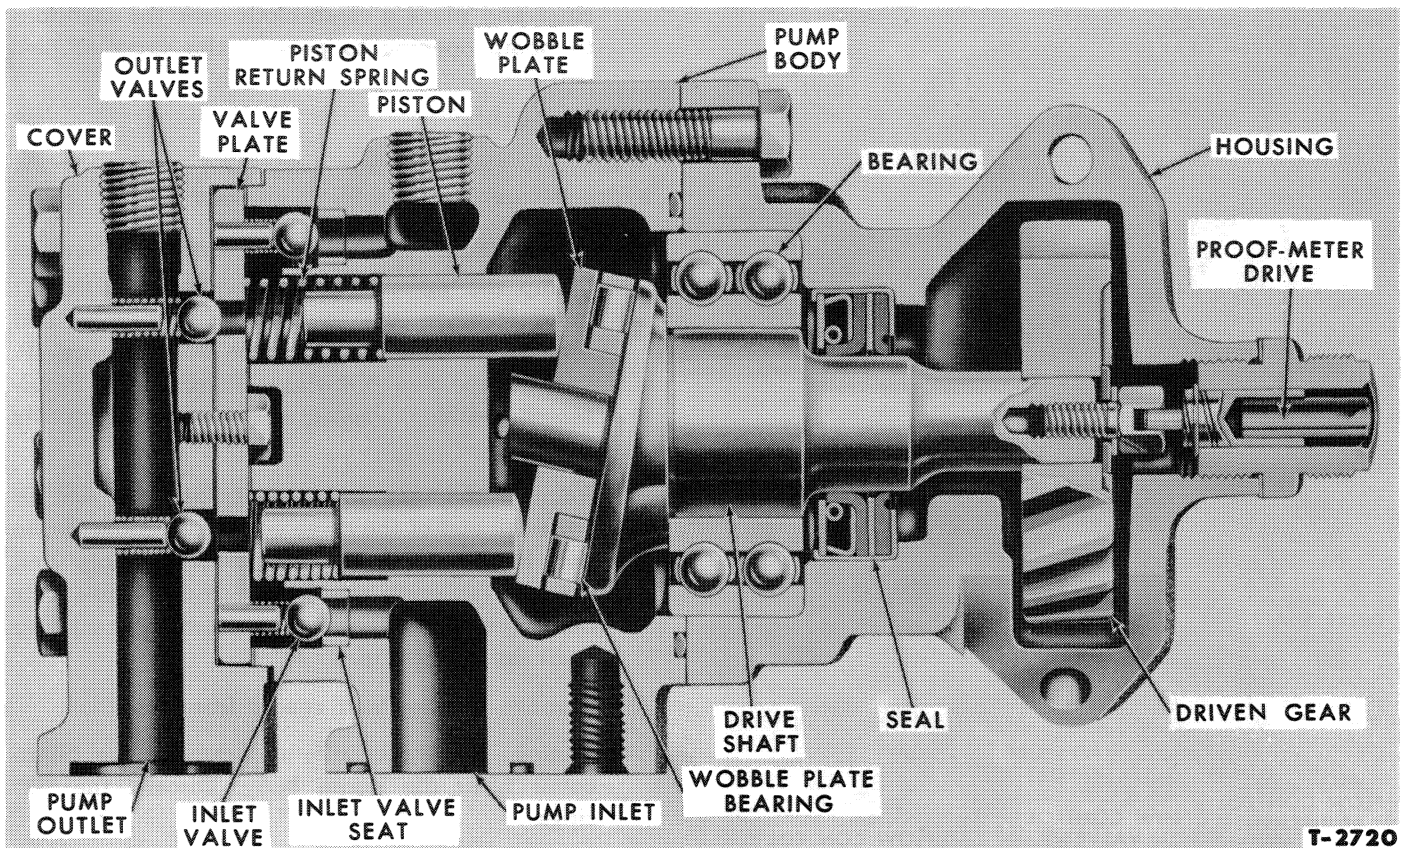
Ball Bearing Piston Type Hydraulic Pump—
